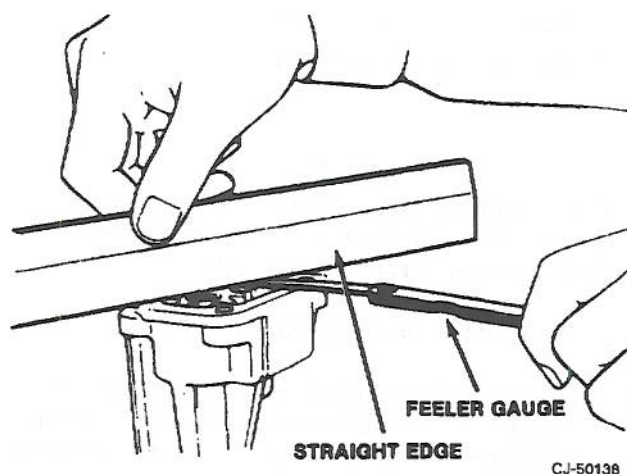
Oil Pump Cover-to-Gear Measurement
